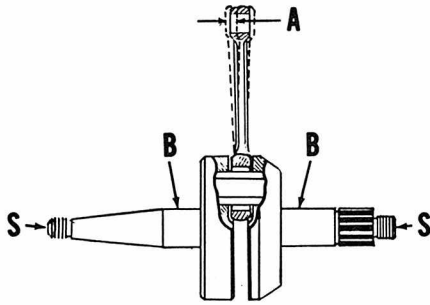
Crankshaft should be supported in lathe centers at (S) to check eccentricity.
